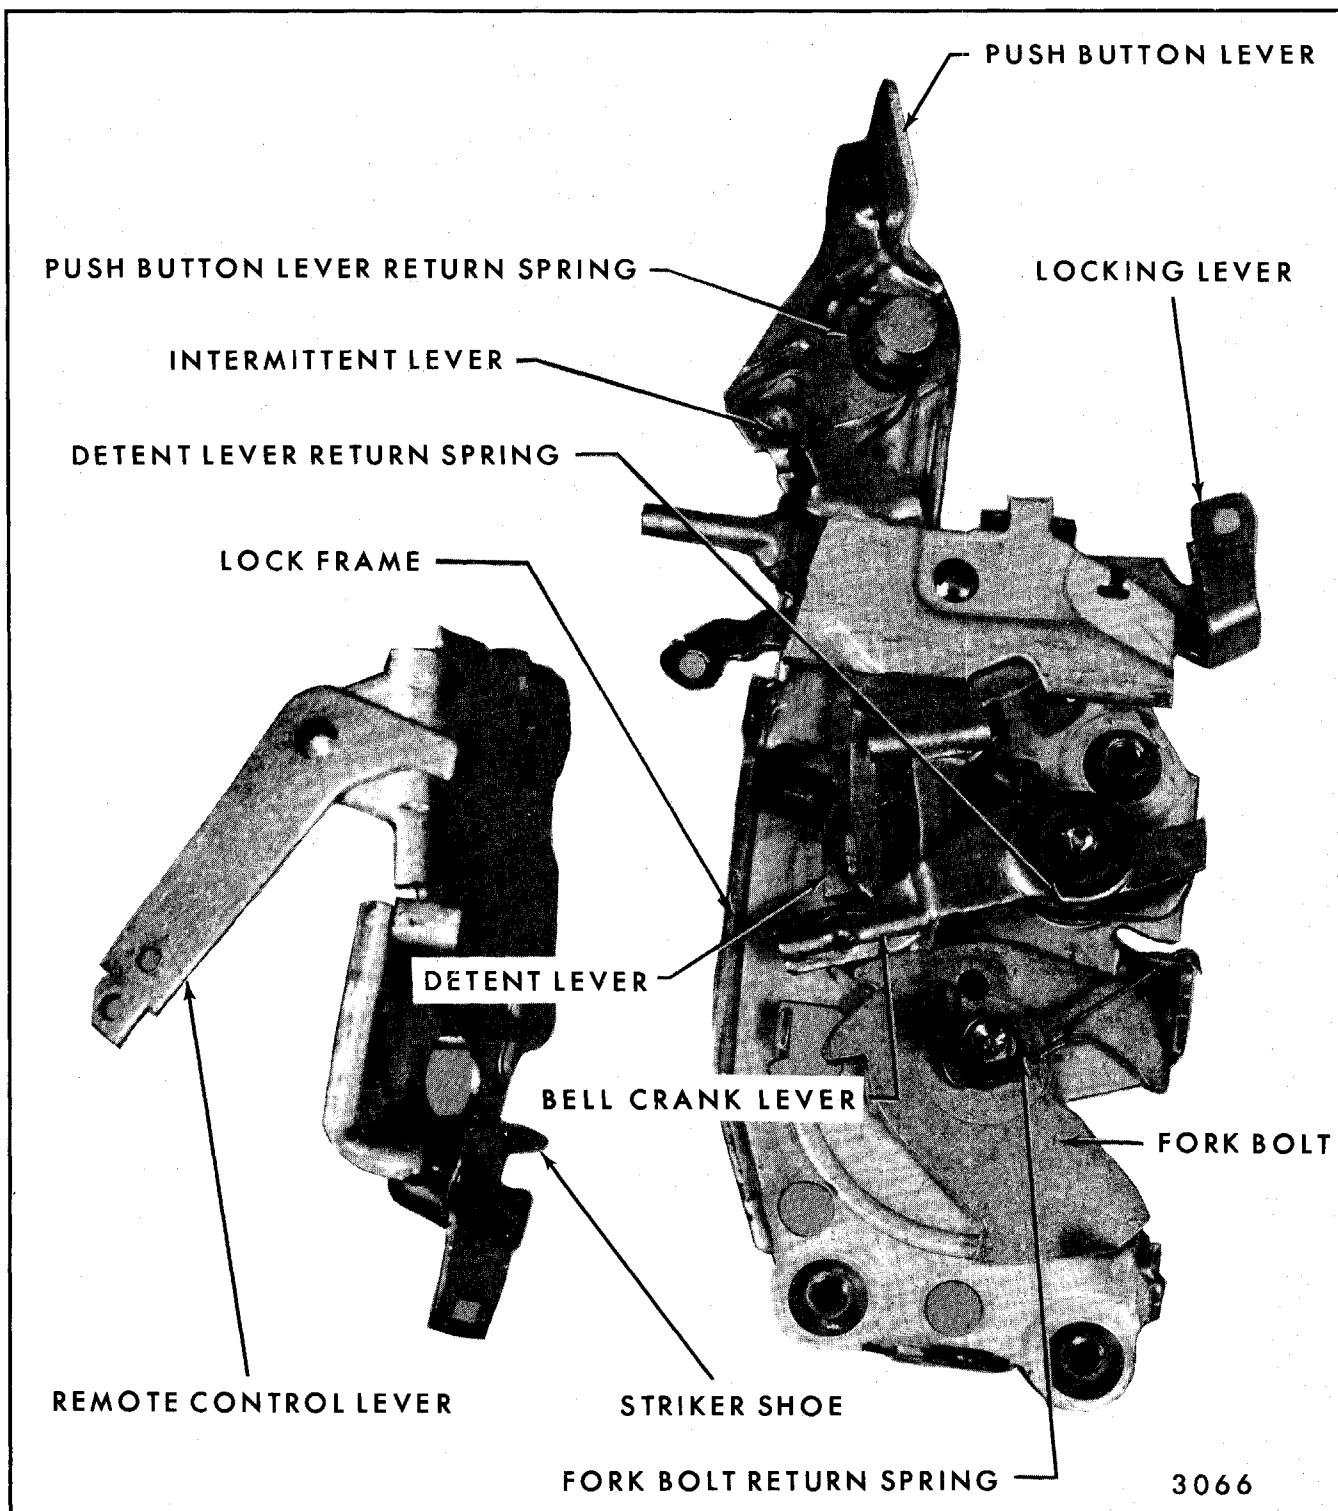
Front Door Lock - "F, H, K and X" Styles
